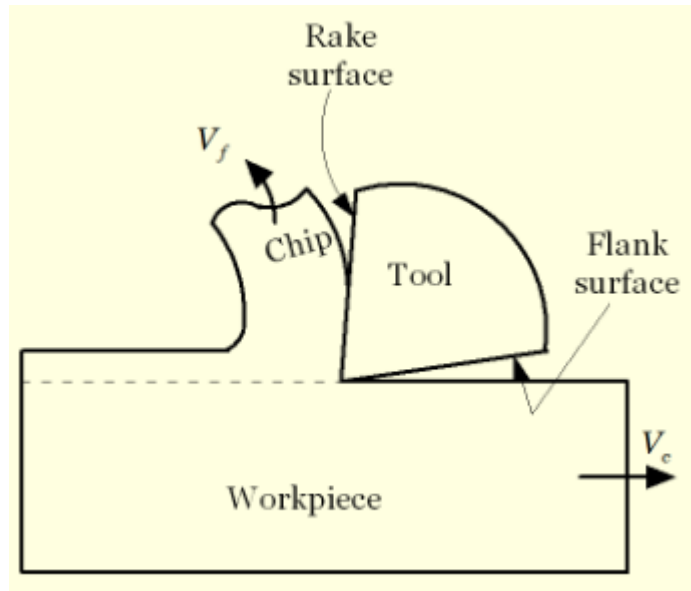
Schematic drawing of a cutting operation, with tool surfaces [96].
